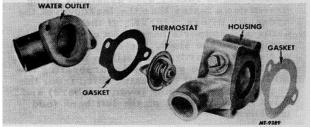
Exploded View of Thermostat Housing, Thermostat and Engine Water Outlet
